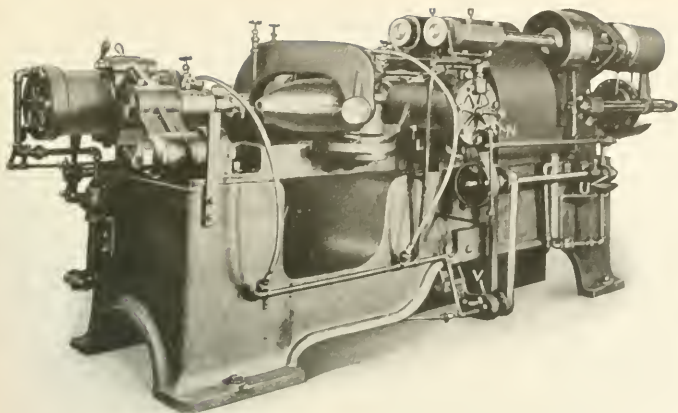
Rear View of Machine, showing Oil Pumps U and V
